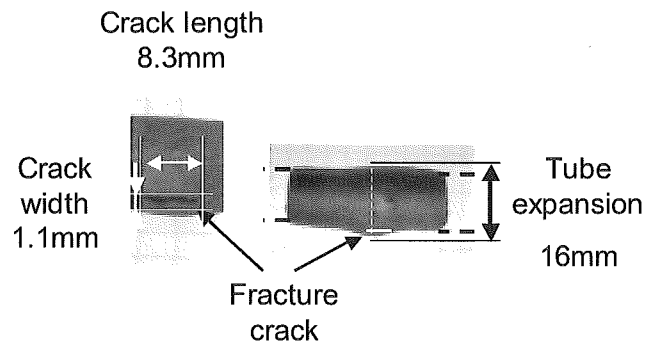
Size of fracture crack and deformation of ruptured tube
